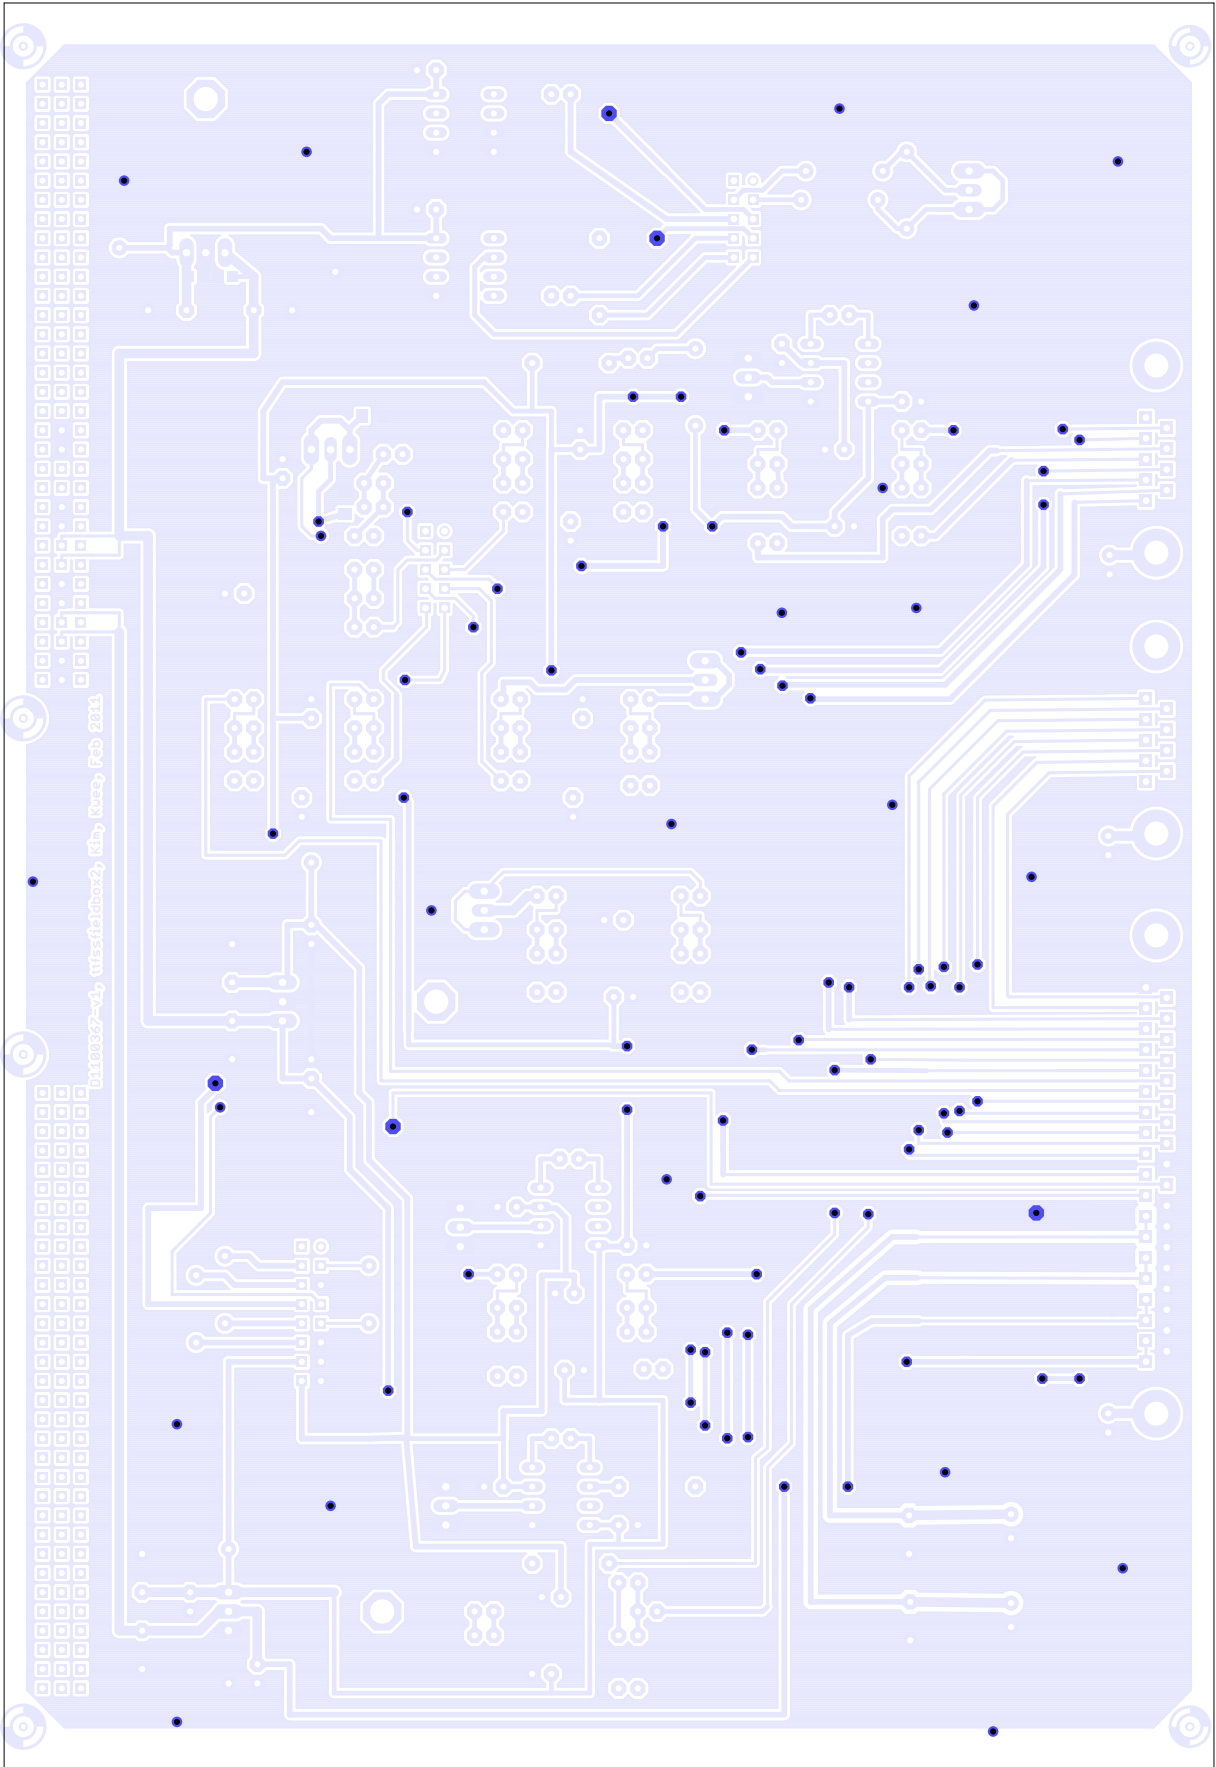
Board bottom view showing connectors, test points, vias and wired components
